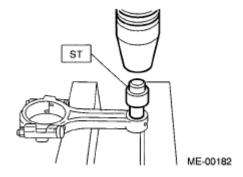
Identifying Connecting Rod Bushing Remover And Installer ST499037100 Courtesy of SUBARU OF AMERICA, INC.
